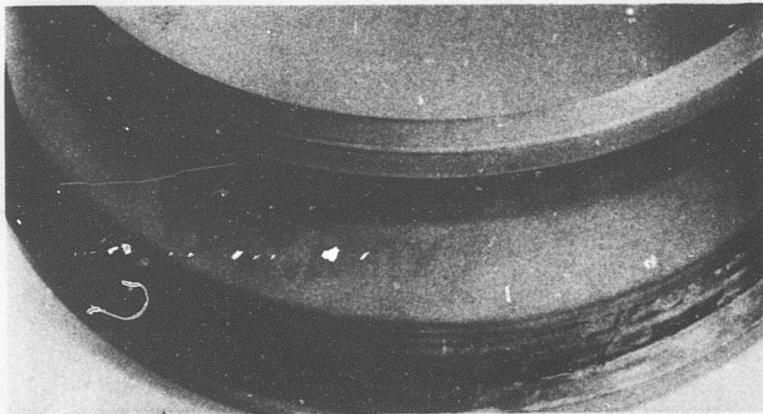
XC11439-Series Bearing After Test, Bearing No. 73, Test No. 6--Damaged Due to Lubricating Oil Pump Shutdown After Running 45 Minutes at 11,500 rpm.
